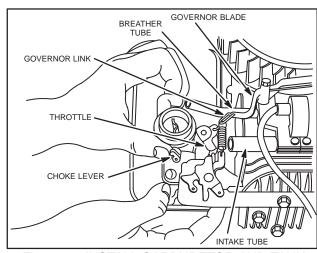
INSTALL CARBURETOR AND TANK ASSEMBLY
